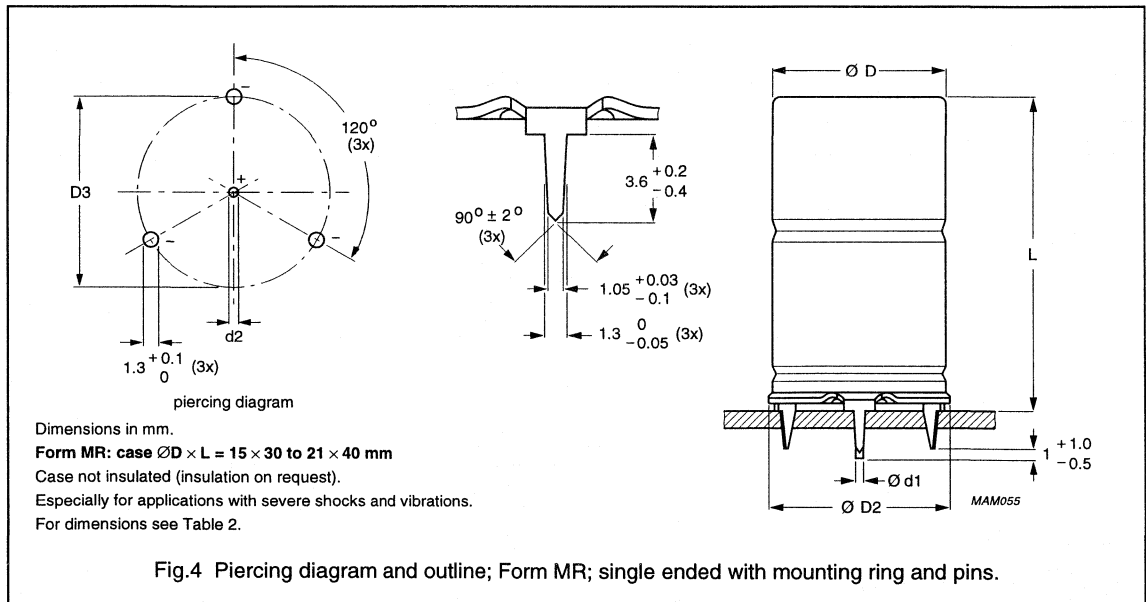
Piercing diagram and outline; Form MR; single ended with mounting ring and pins.
